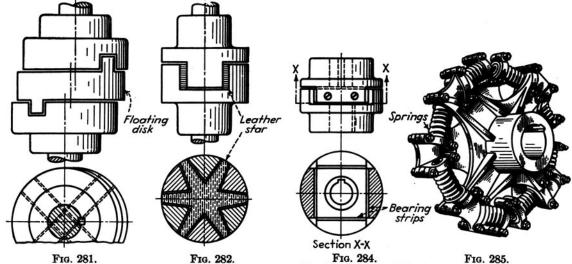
The Oldham form of coupling made by W. A. Jones Foundry and Machine Company is of the two-jaw type with a metal disk. Is used for transmitting heavy loads at low speed.
